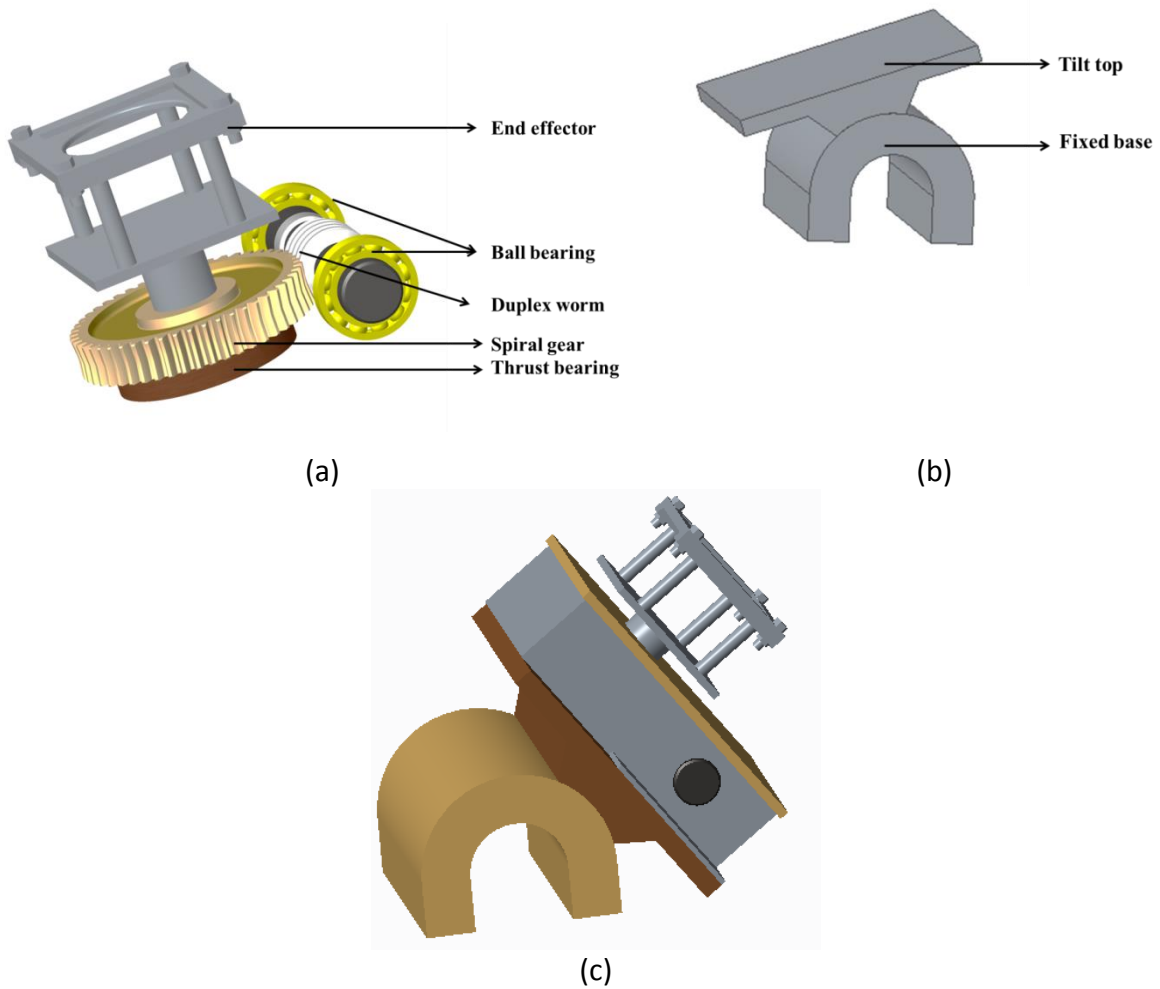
(a) Gearbox with end effector (b) Tilting table (c) Assembly
